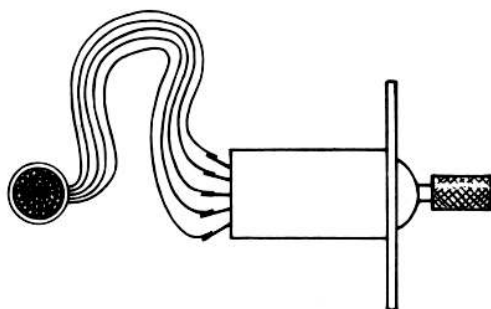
FORMING SPARE WIRE ON KEY STRIP TERMINATIONS.
